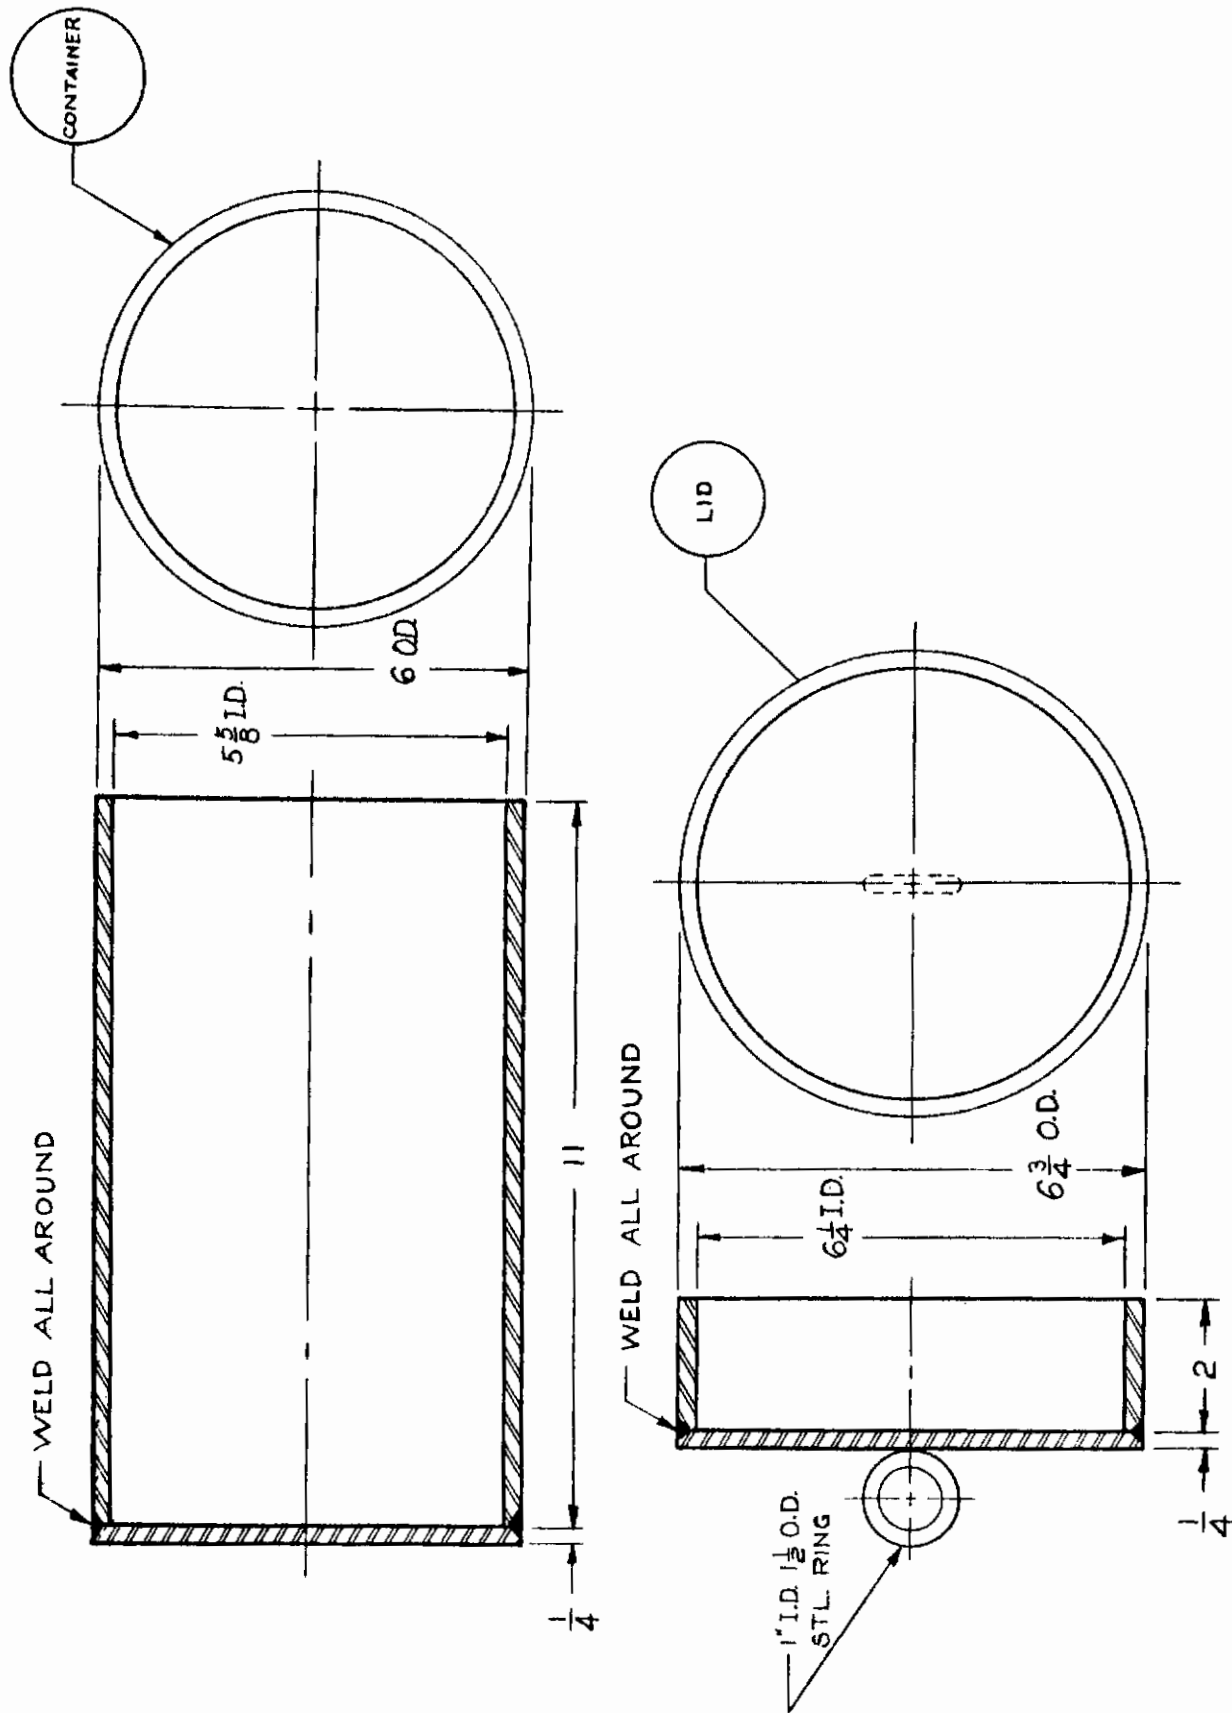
THE BERYLLIUM CORPORATION SKETCH OF STEEL CONTAINER ASSEMBLY EMPLOYED EXPERIMENTALLY IN THE DEVELOPMENT OF EXTRUDED BERYLLIUM SHAPES.
